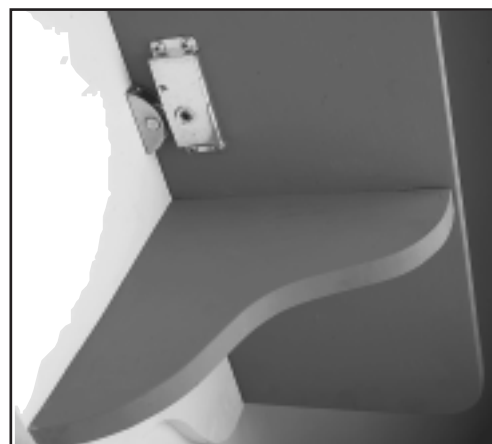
A Type 1 Latch with braces and a 'U' Receiver hold wall panels tight in a 90° corner joint.
